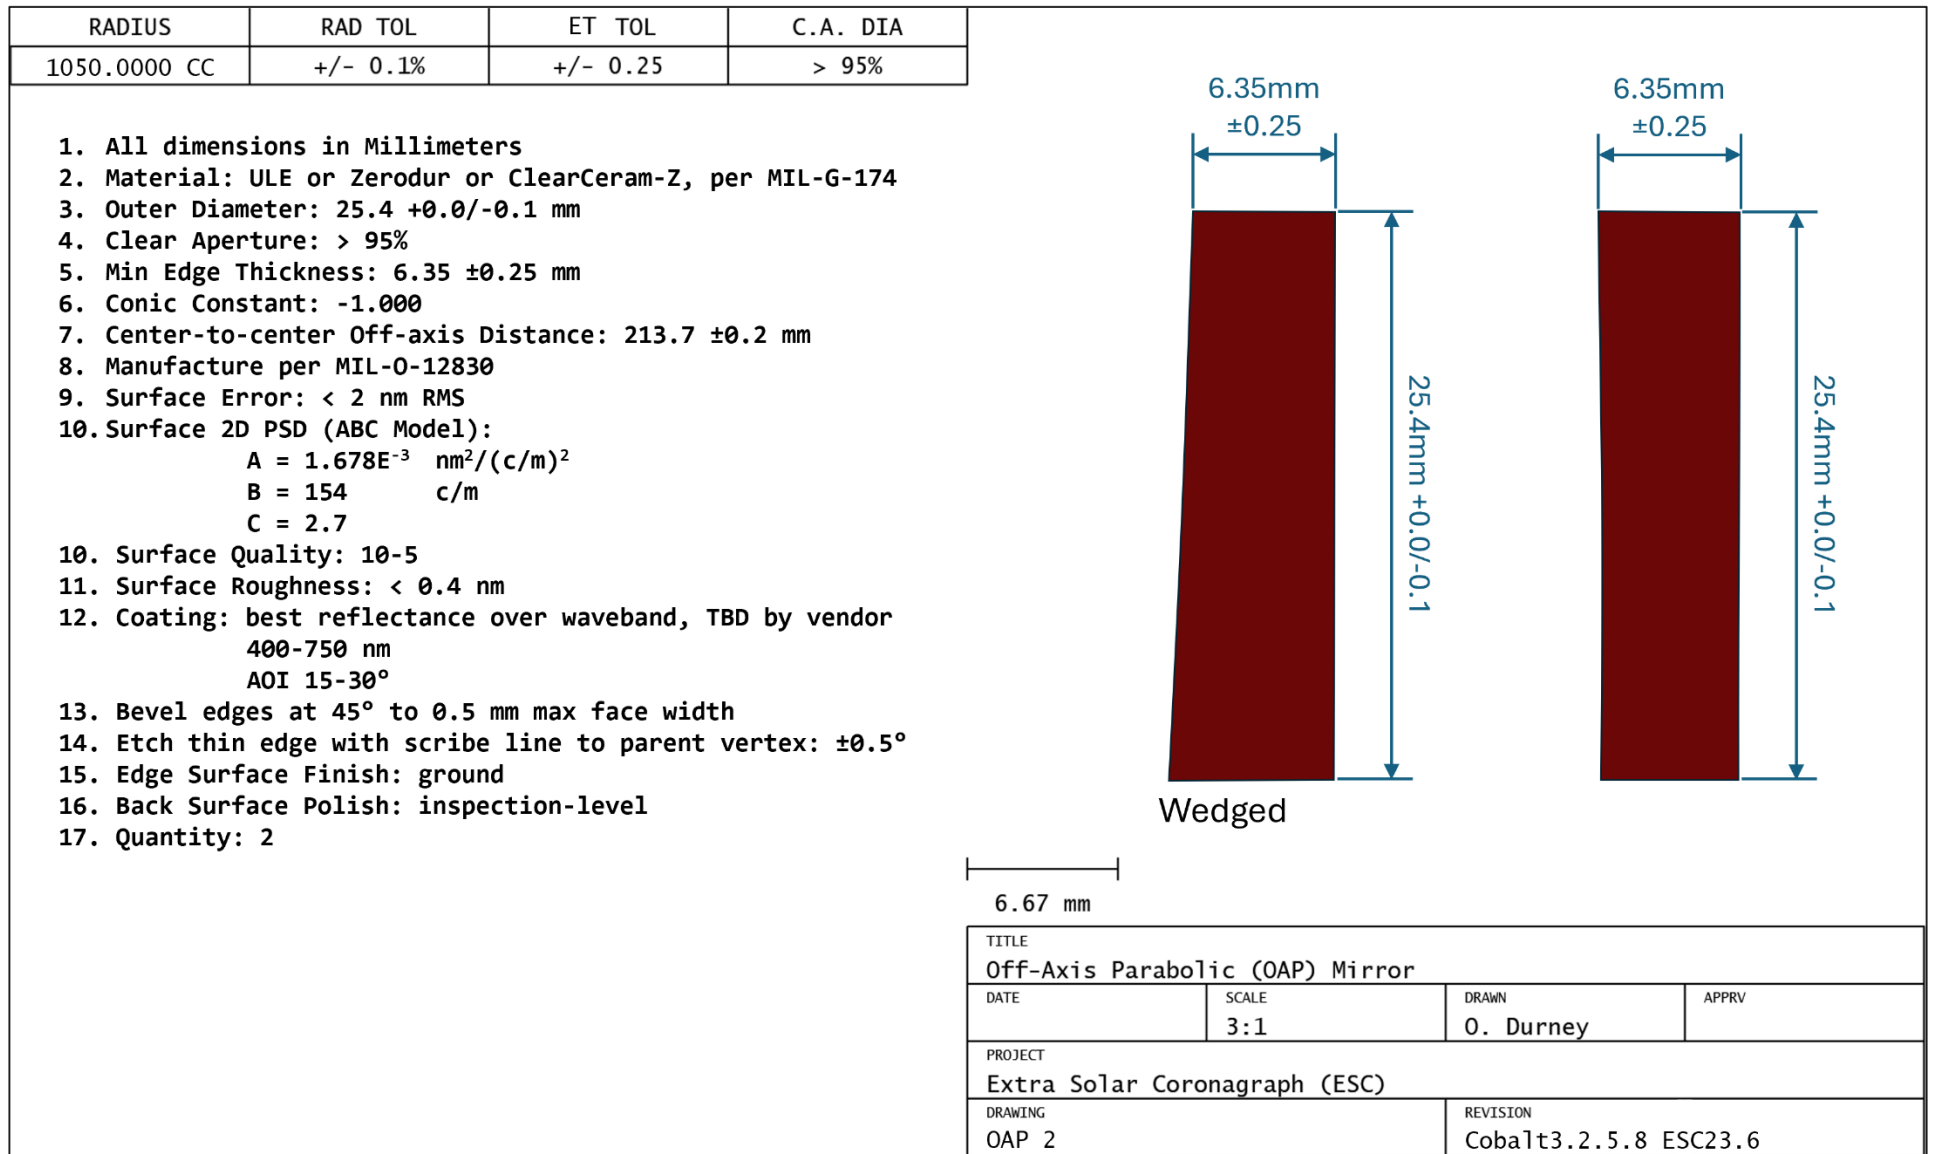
Off-axis parabolic mirror, OAP 2 drawing
